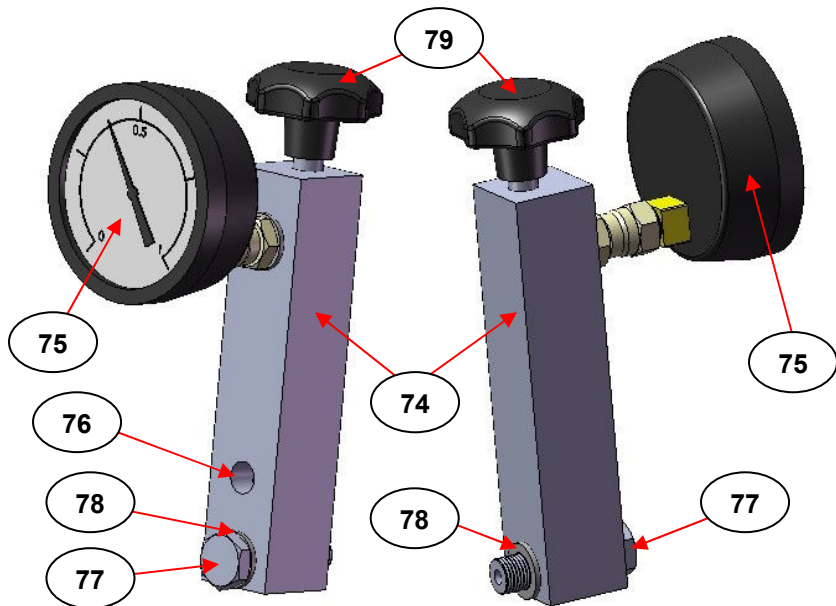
Front and Rear View of Low Tonnage Gauge Kit
